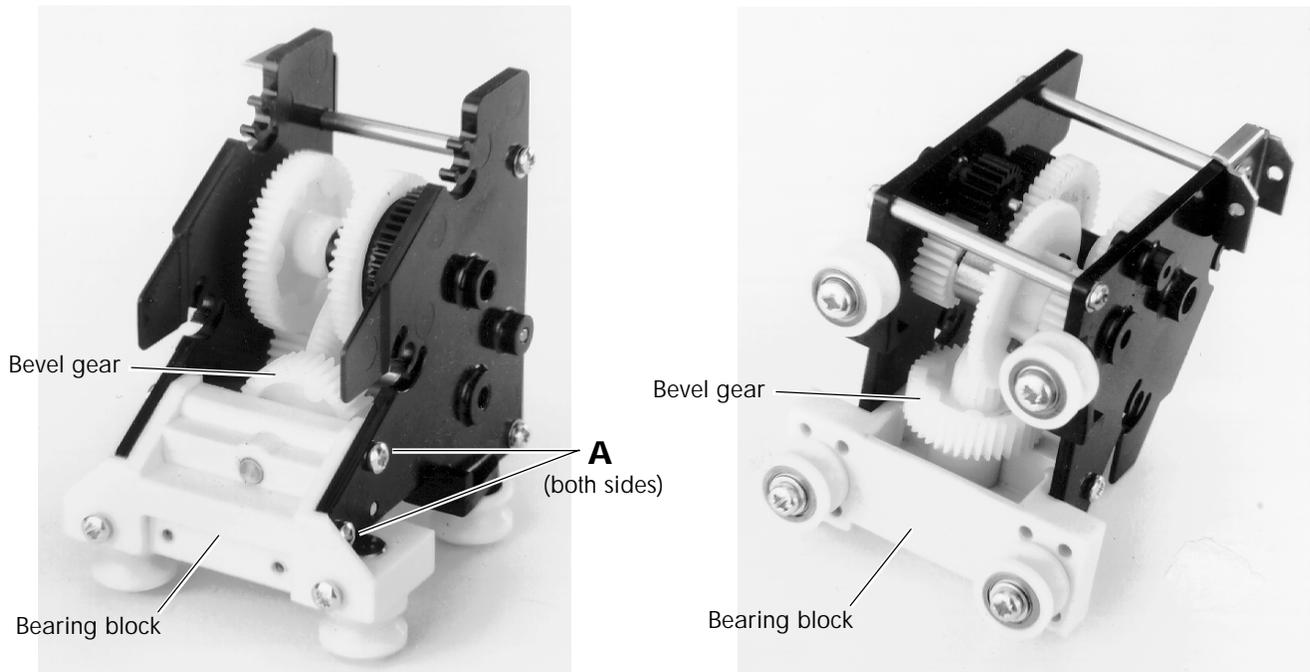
Ribbon cartridge carriage gearbox (two views)
